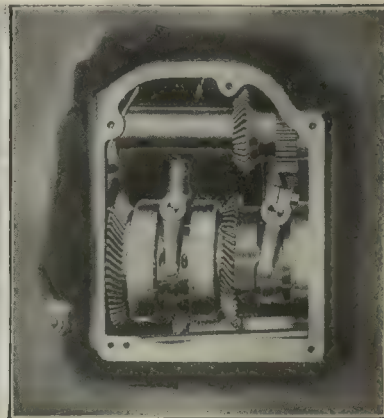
ARRANGEMENT OF GEARING CONTROLLING FEED CHANGES
